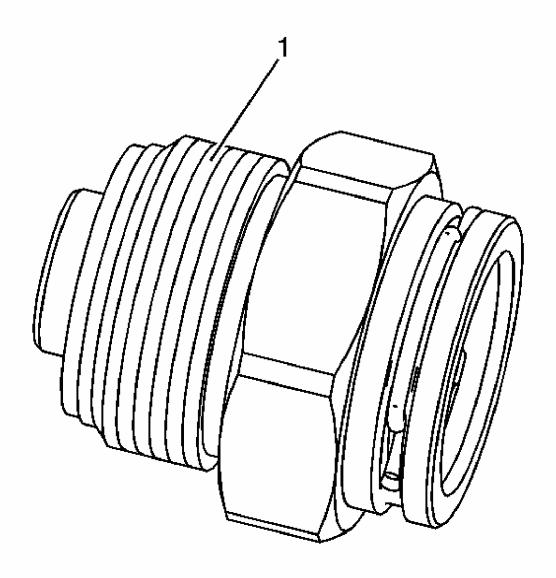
Identifying Oil Filter Adapter Pipe Fitting Courtesy of GENERAL MOTORS CORP.
